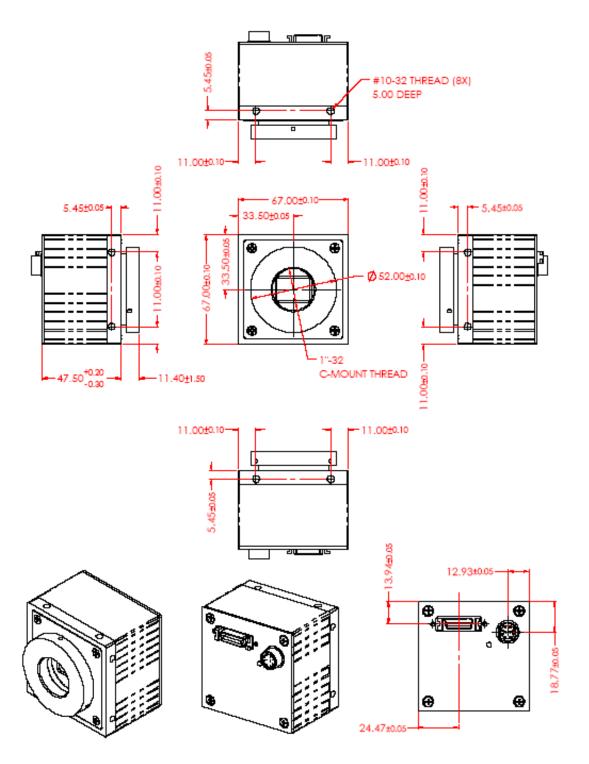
IPX-2M30-L and IPX-2M30H-L Dimensional Drawings
